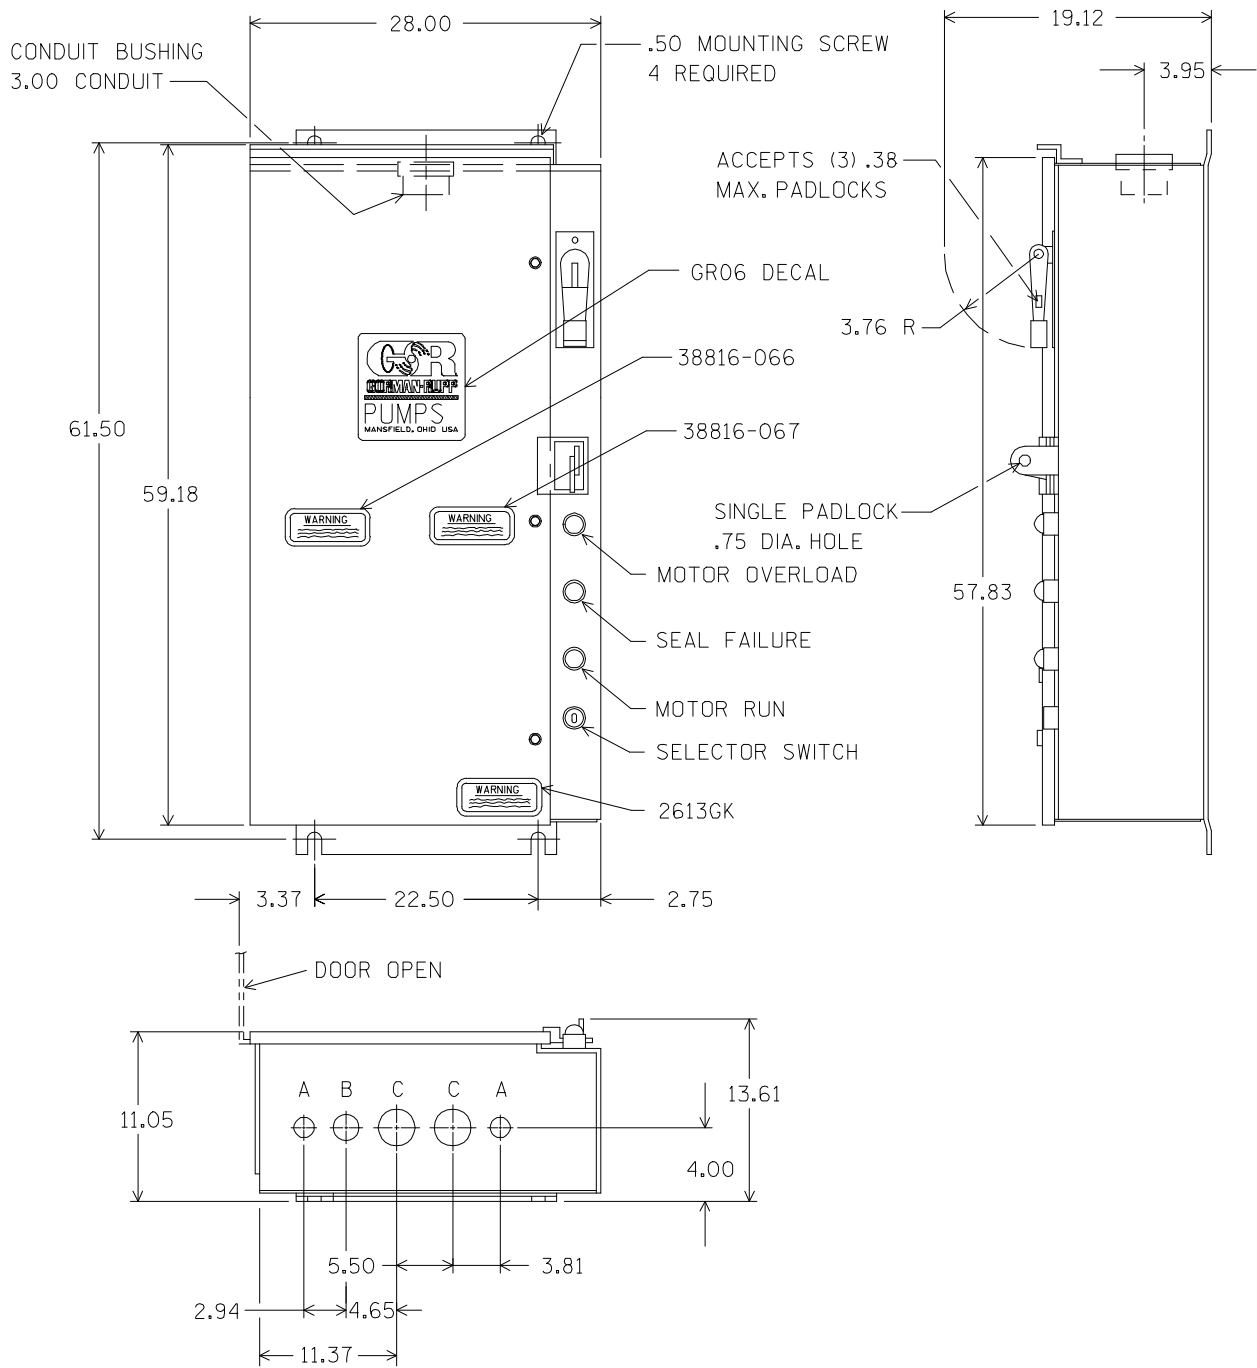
27515-571 And 27515-572 Control Box Dimensions
